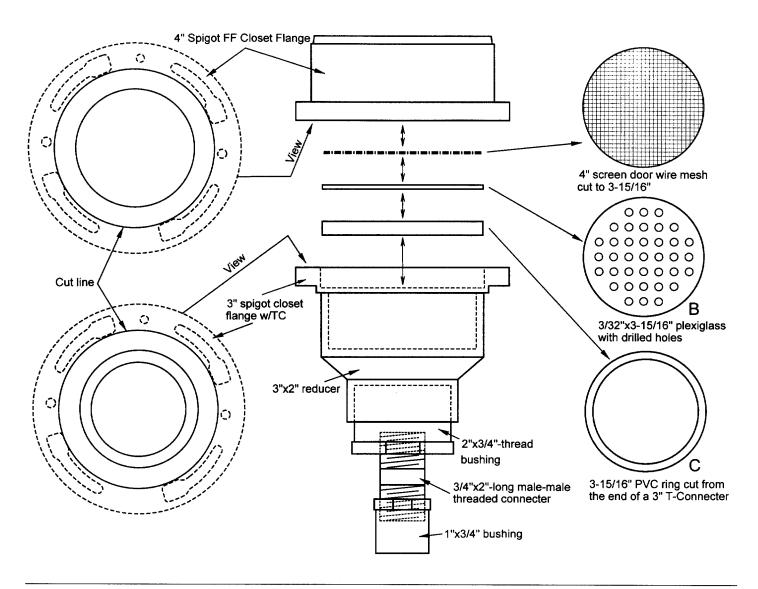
12.5 cm (4.9") filter holder. The filter holder is constructed from spigot closet flange pieces. The lower flange has a recess in which we fit Plexiglas and wire mesh disks to support the filter paper. An explanation for the wire mesh is given in the text. The PVC ring in included to raise the Plexiglas disk flush with the flange lip. Small spring-loaded clamps hold the pieces together and seal the holder during filtering.
